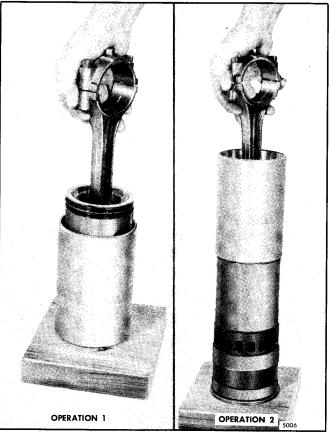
Installing Piston and Connecting Rod Assembly in Ring Compressor and Cylinder Liner
